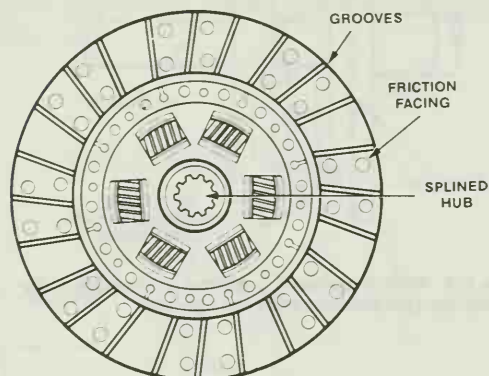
The clutch disc has a splined hub and friction surfaces on each side. (American Motors Corporation)
